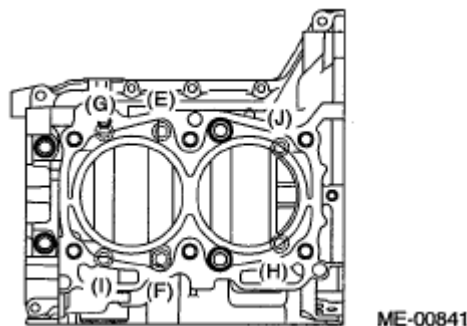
Identifying 10 mm Cylinder Block Connecting Bolts Tightening Alphabetical Order
